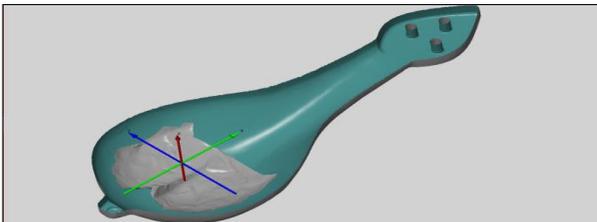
Inner parts of surface after scanning, cover plate removed from points cloud
